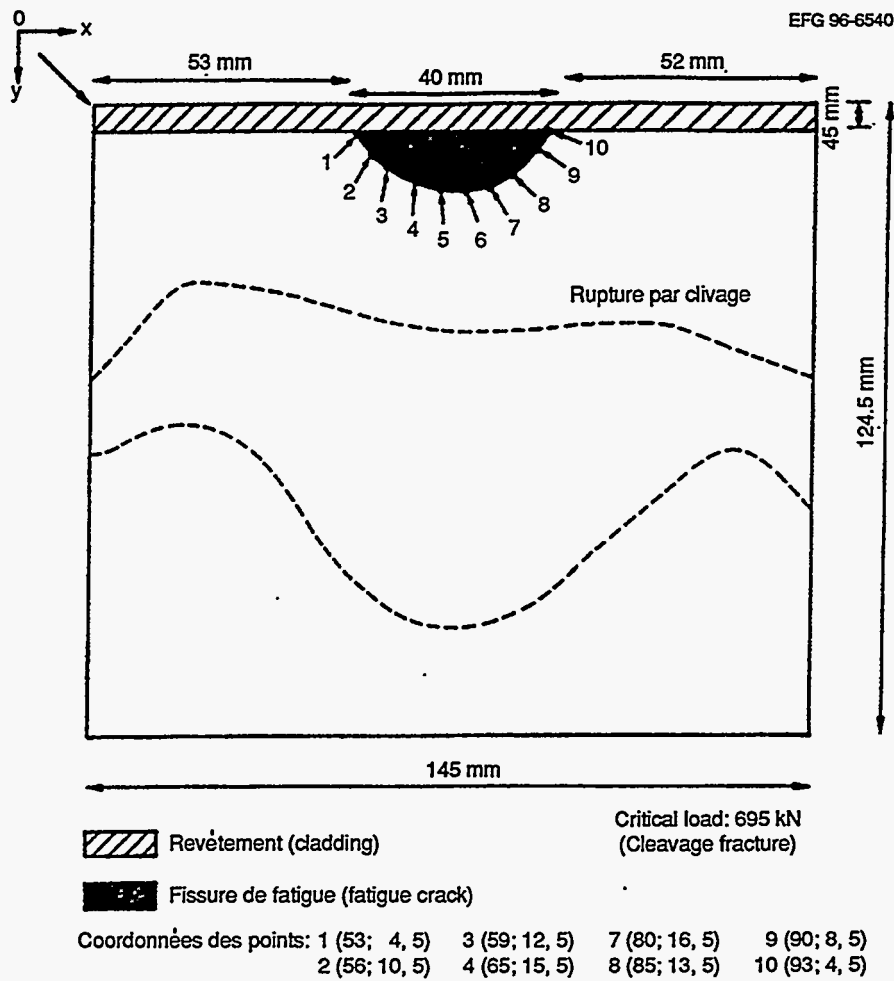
Schematic of posttest fracture surface from DSR3 clad beam specimen
